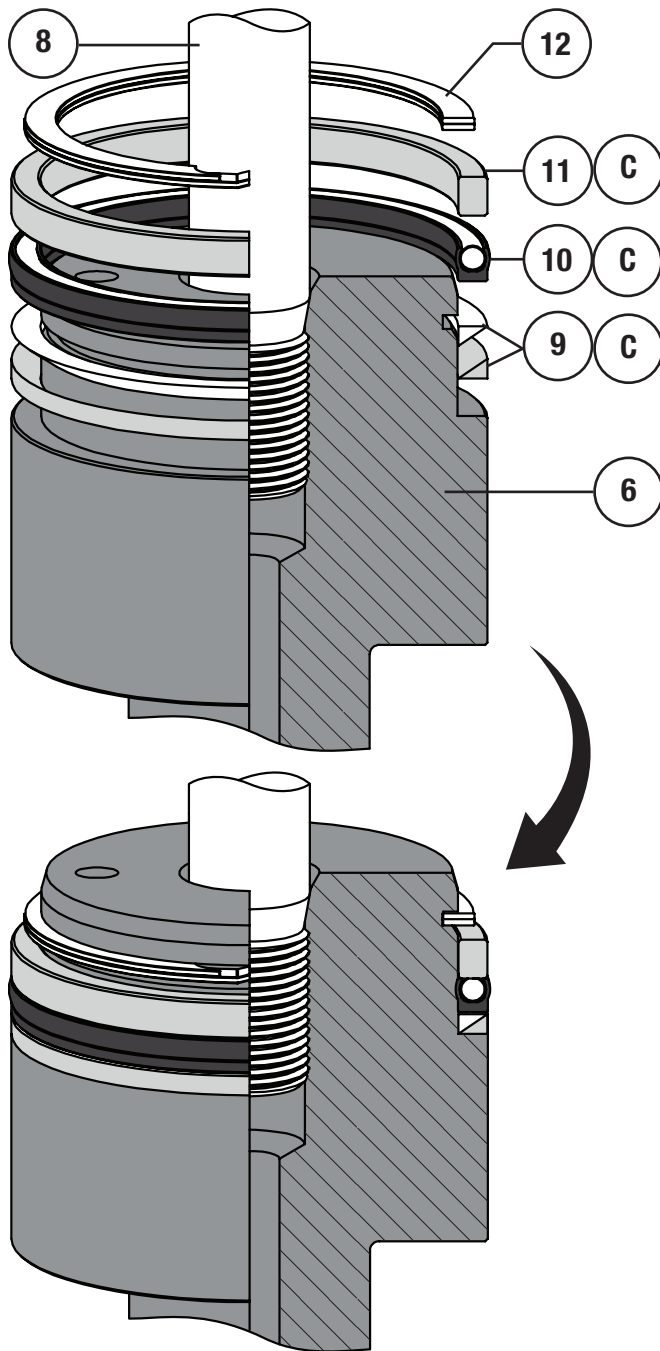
Three-Piece Plug Seal With Anti-Extrusion Rings
